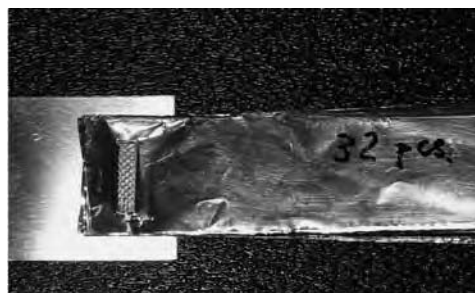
Thirty-two layers of fine aluminum foil to aluminum plate; particularly of interest to battery manufacturers
